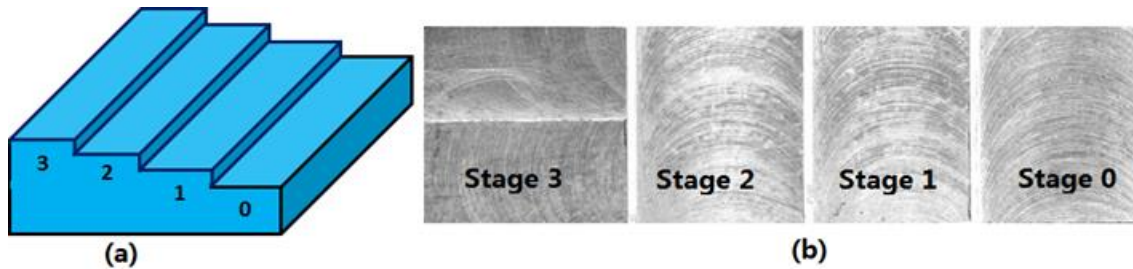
Aluminum block used in validation test: (a) side view of the block; (b) top surfaces of the stages after finish milling
